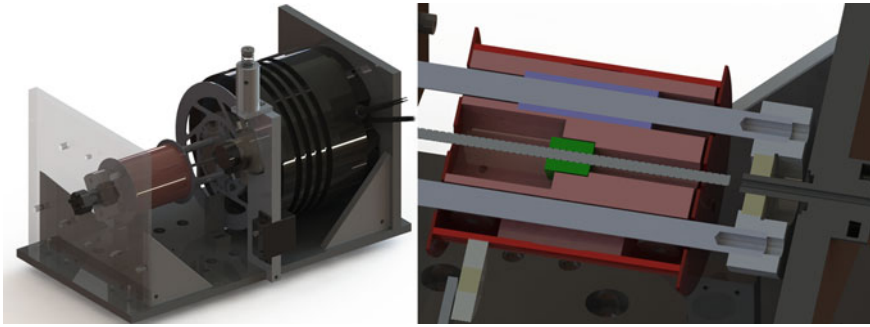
Left* CAD view of the final version of the winches; *Right* close-up on the cut view of the drum (same color coding as in Fig. 2)
